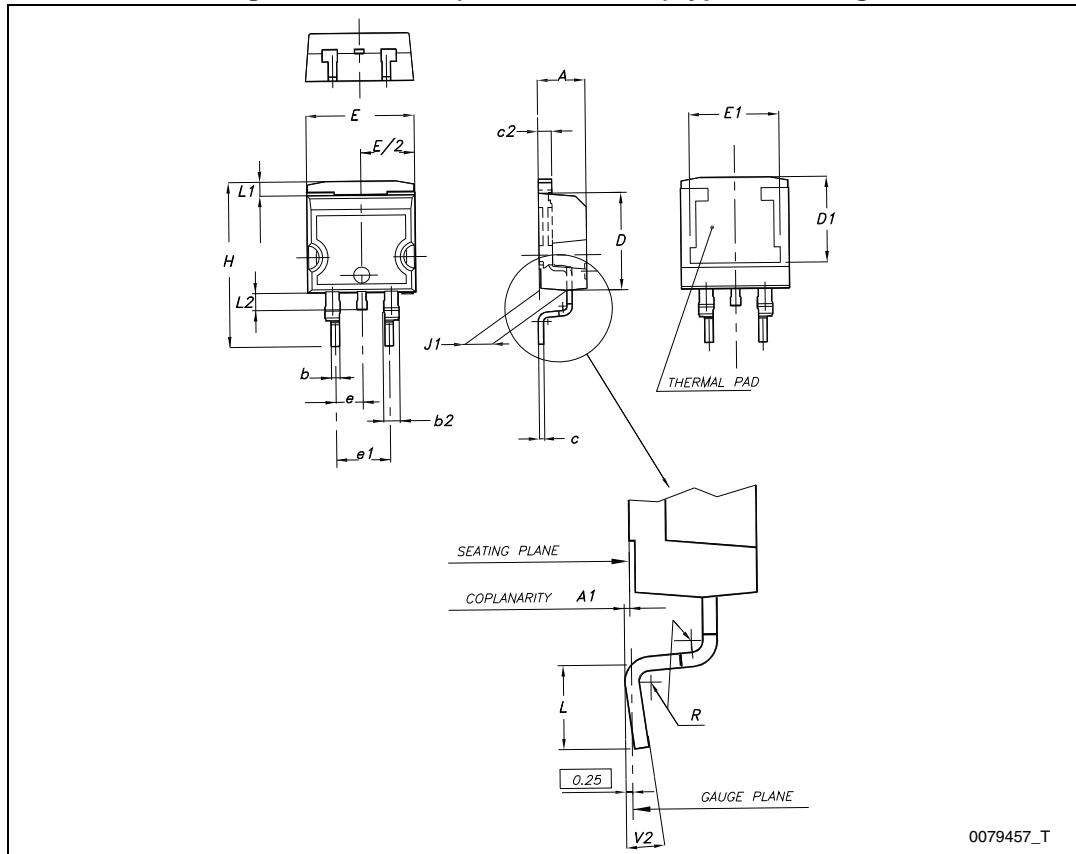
D²PAK (SMD 2L STD-ST) type A drawing
